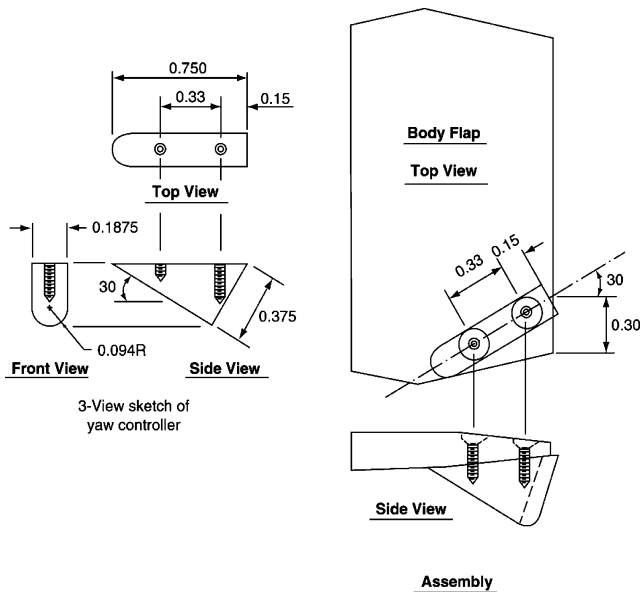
Sketch of yaw controller as built and tested, showing the pertinent dimensions and the arrangement when assembled (dimensions given in inches).
